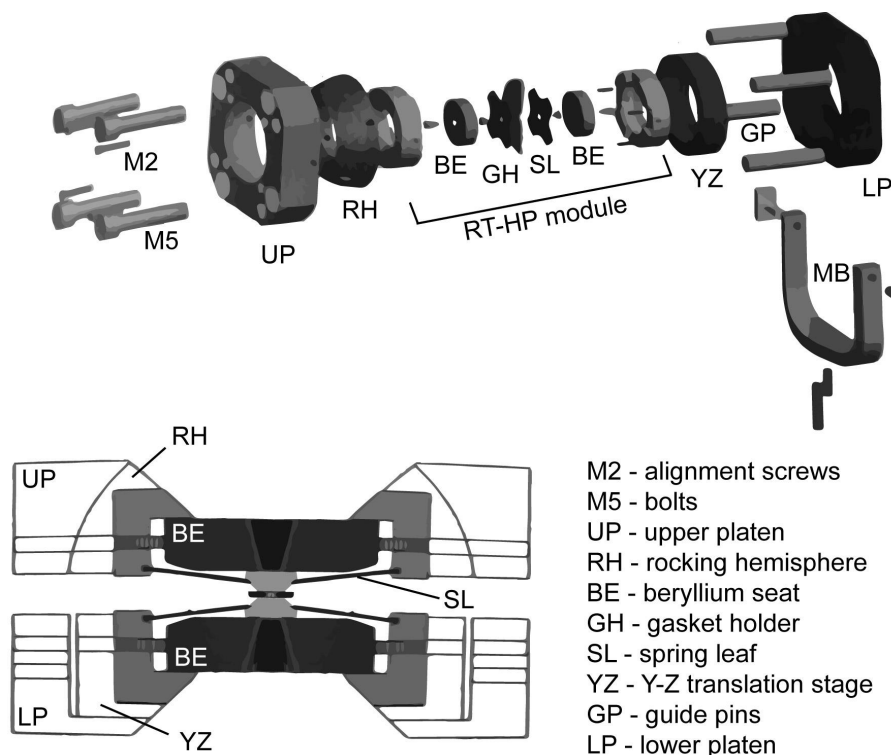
View section and exploded view of an ETH diamond-anvil cell (after Miletich 2000).
